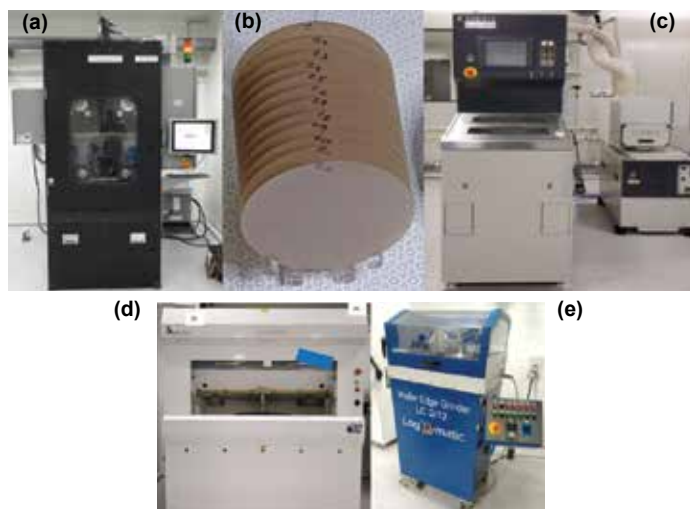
(a) Diamond Wire Multi-wire Saw Machine, (b) Sliced SiC Wafers from SiC ingot, (c) Wafer Surface Grinder, (d) CMP Machine, (e) Wafer Edge Grinder
